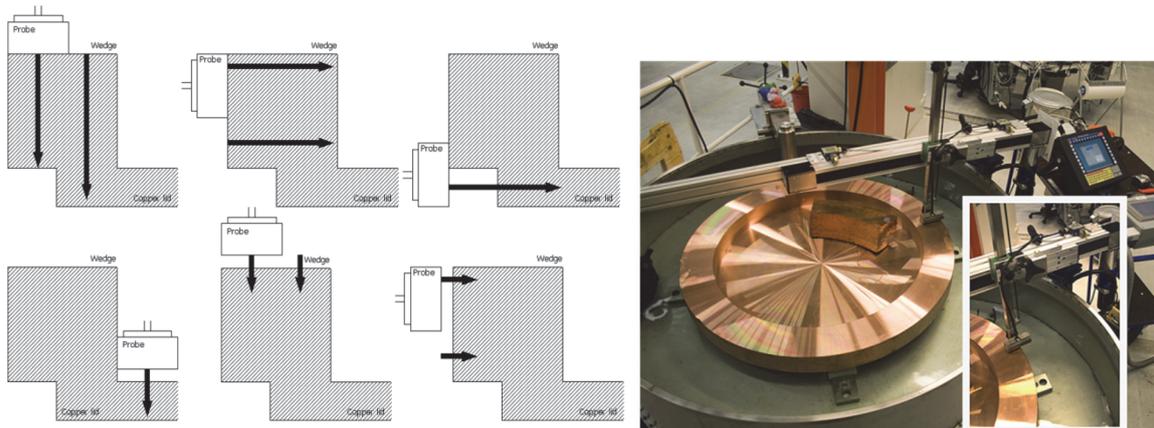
Multi-Parameter-POD; Copper canisters for deep deposit SKB/Posiva; Canister parts planned for the NDT inspection: copper lid
